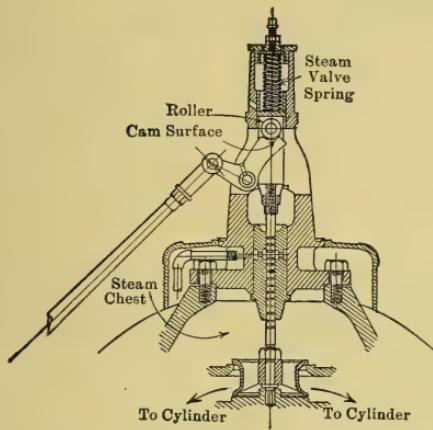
Admission Valve and Operating Mechanism, Lentz Engine.
